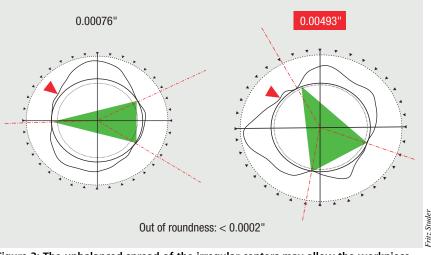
The unbalanced spread of the irregular centers may allow the workpiece to move in the workhead or tailstock centers during grinding.
